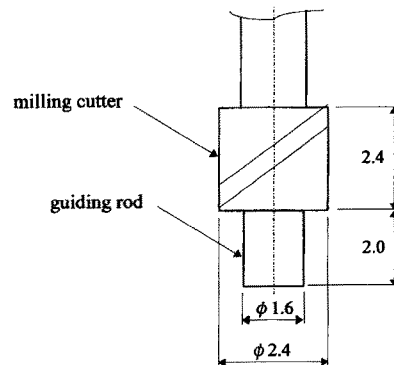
Special tool ground to avoid eccentricity during the enlarging of the minor drilled hole (mm).
